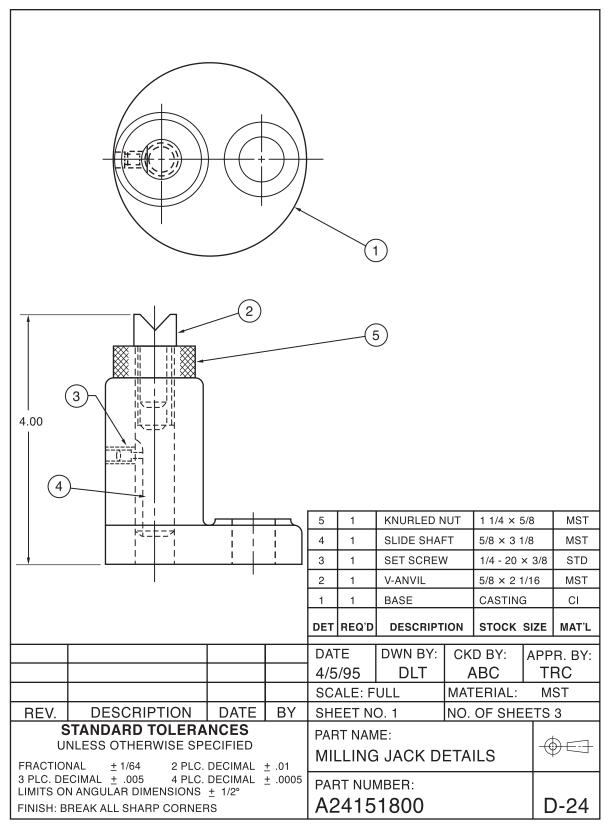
■ Example of a parts list on an assembly drawing
